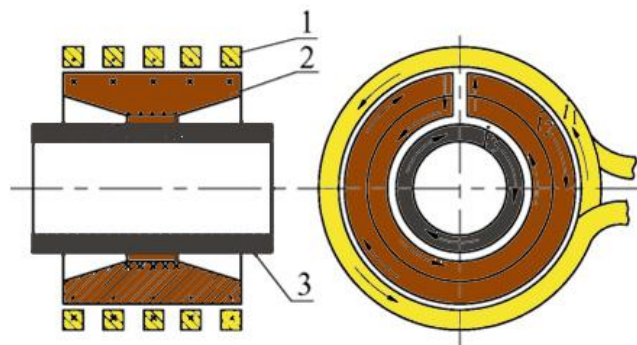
1=A multi-turn coil, 2=field shaper and 3=workpiece [18].
